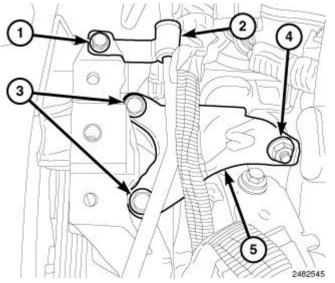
Right Engine Mount Courtesy of CHRYSLER LLC
